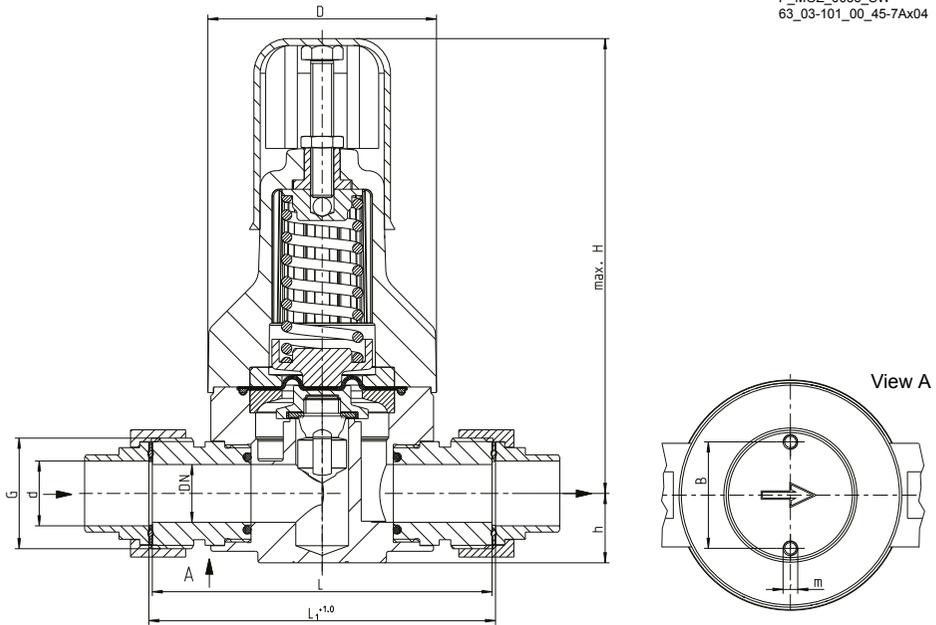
Dimensional drawing DHV-U SS - dimensions in mm
